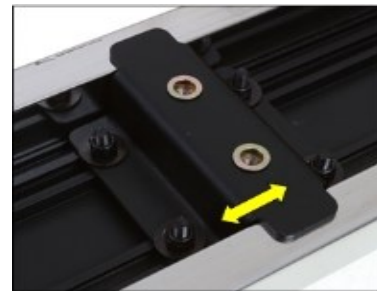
Slip M6X1-20mm Square Head Bolts Into The Bottom Channels
